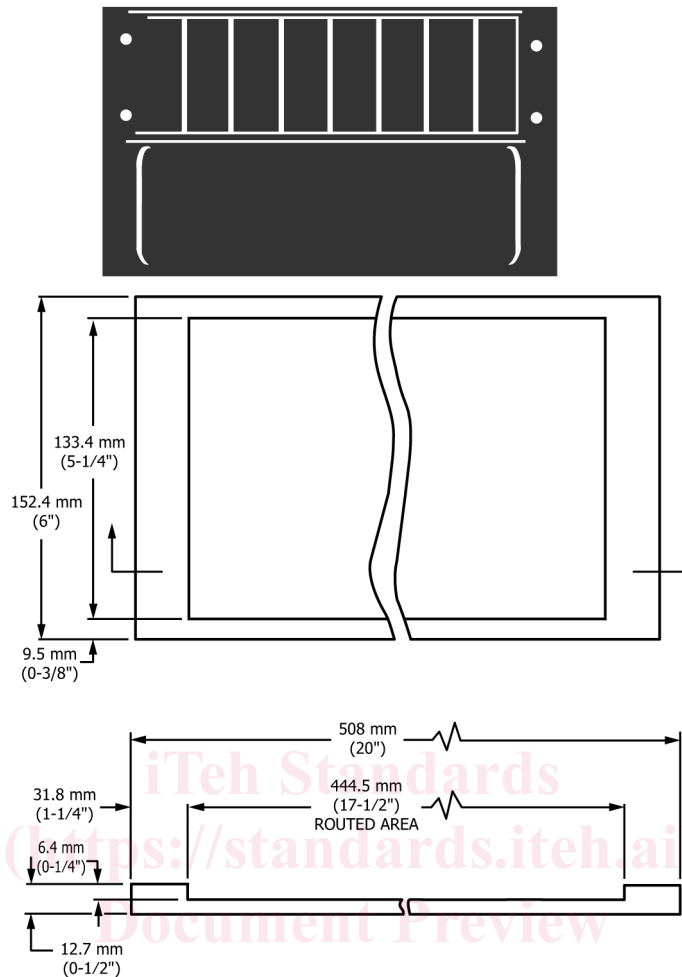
Routed Specimen Mounting Board Showing Placement of Specimens
